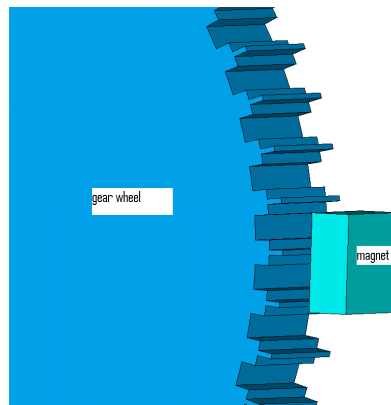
A 3D schematic view of the proposed gear wheel with added rectangular
